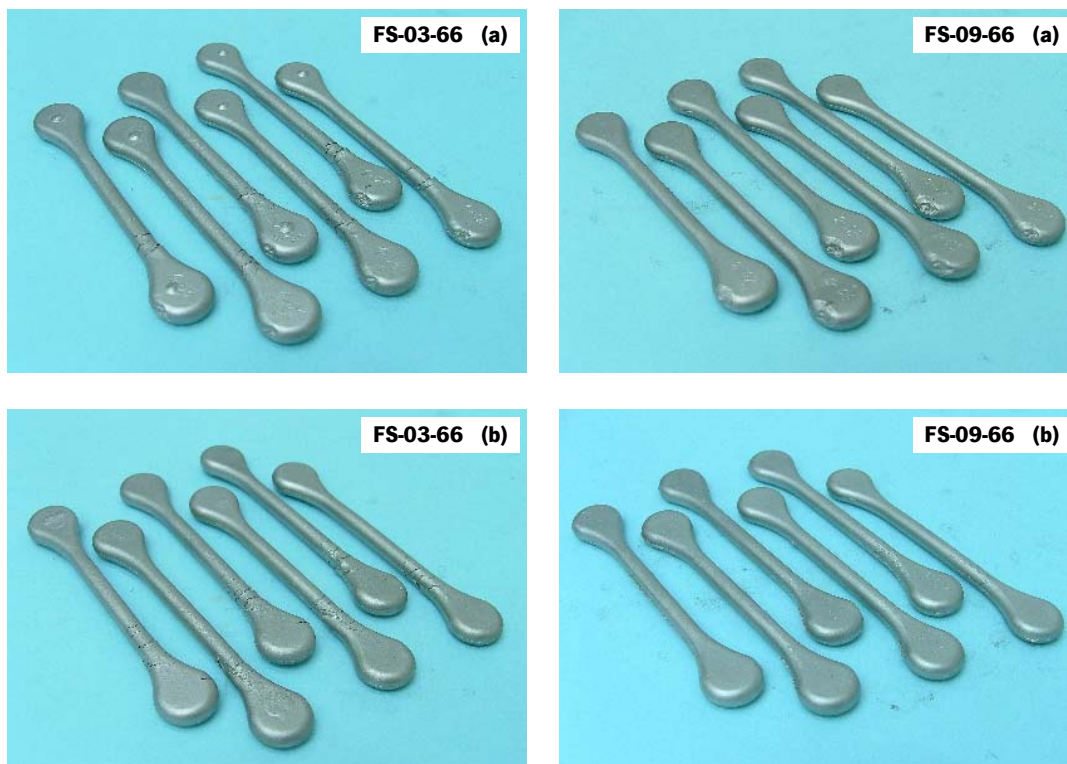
Sintered tensile specimens showing the upper side (a) and bottom side (b) relative to the sintering position.
